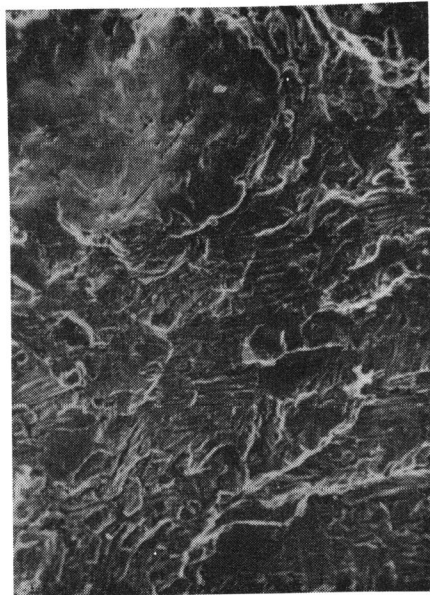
Fracture Surface SEM (Location see Fig. 2)
